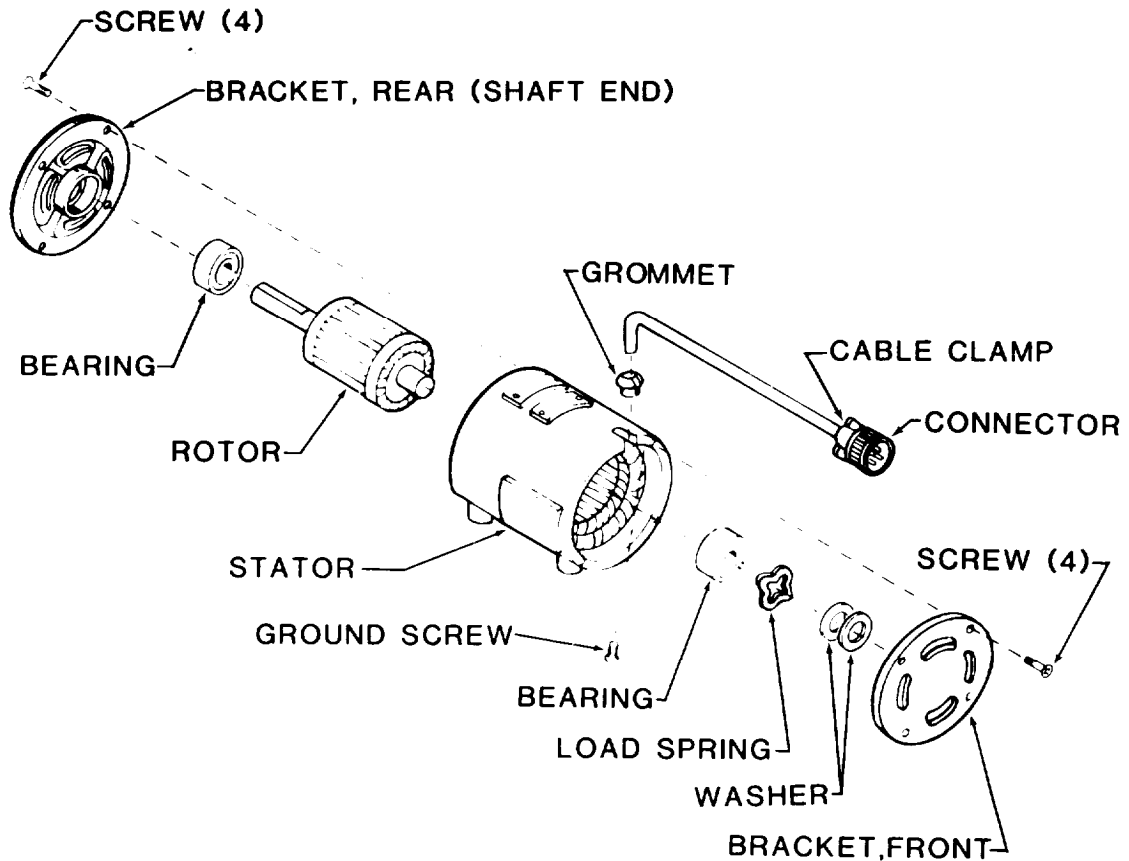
Motor Assembly, Welco Model M-4720-50
